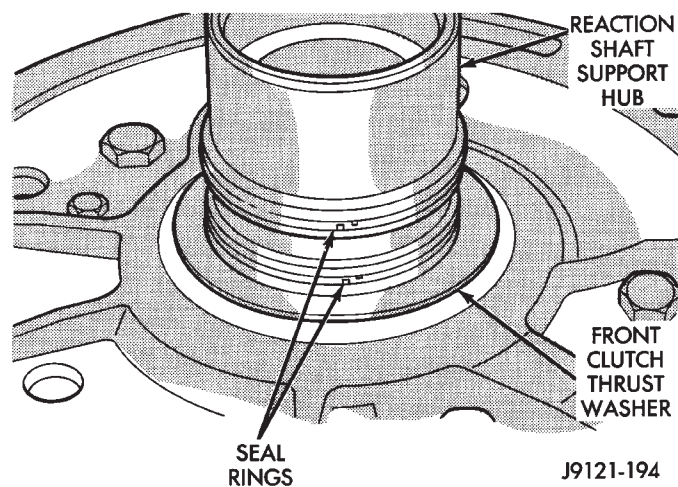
Reaction Shaft Support Seal Rings And Front Clutch Thrust Washer
